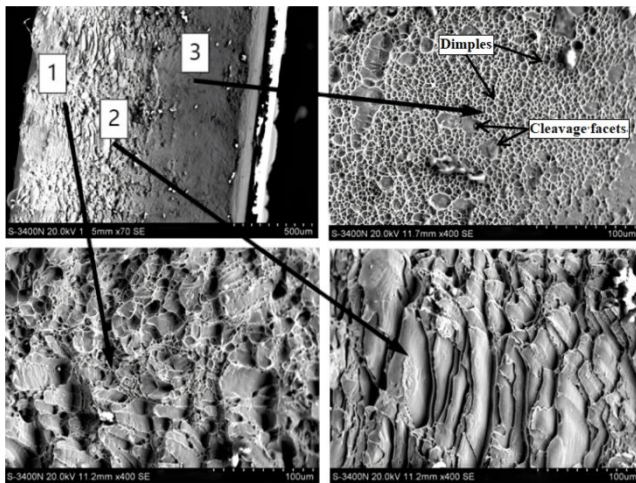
Fracture morphologies of tensile specimens with a heat input of 2.67 kJ/cm
